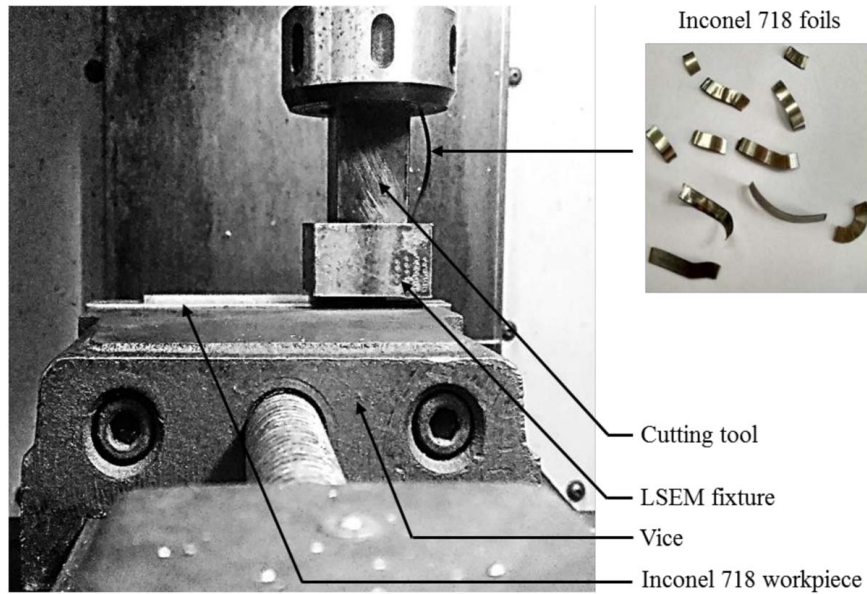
The HAAS milling machine setup with cutting tool, LSEM fixture, and workpiece [26]. Also shown in the inset are Inconel 718 foils from LSEM.
